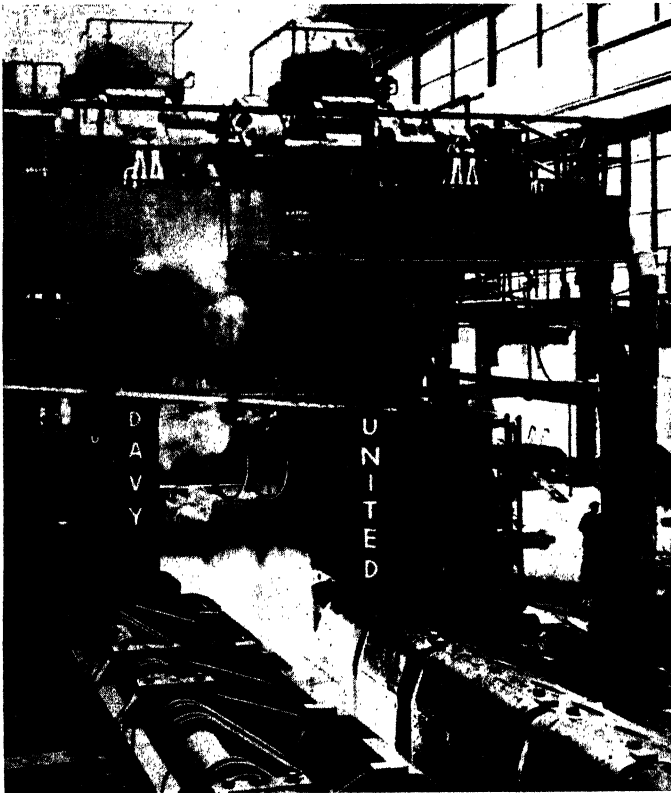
A 45 × 80-in. Reversing Blooming and Slabbing Mill.
